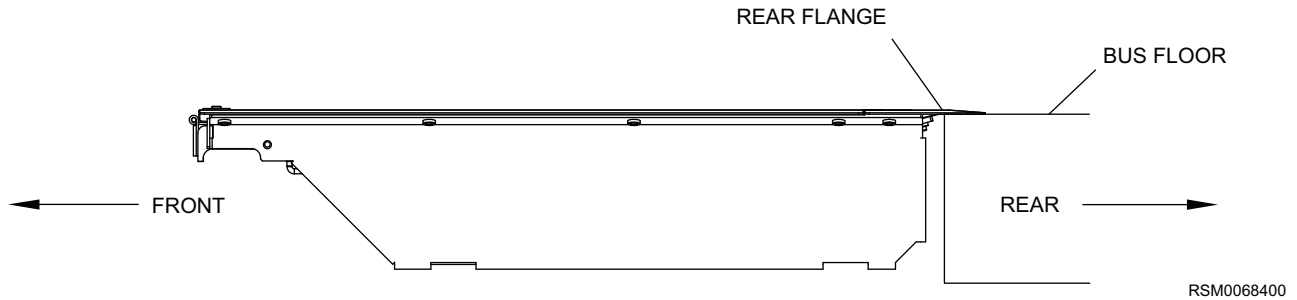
RAMP INSTALLATION (SHORT RAMP SHOWN)
